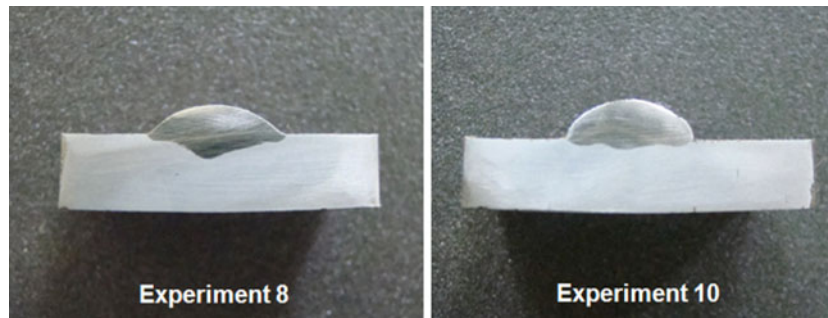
Weld bead geometry after preparing the specimens
